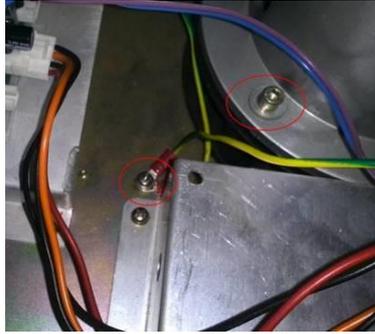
Diagram for Dismounting of Centrifuge Assembly II
